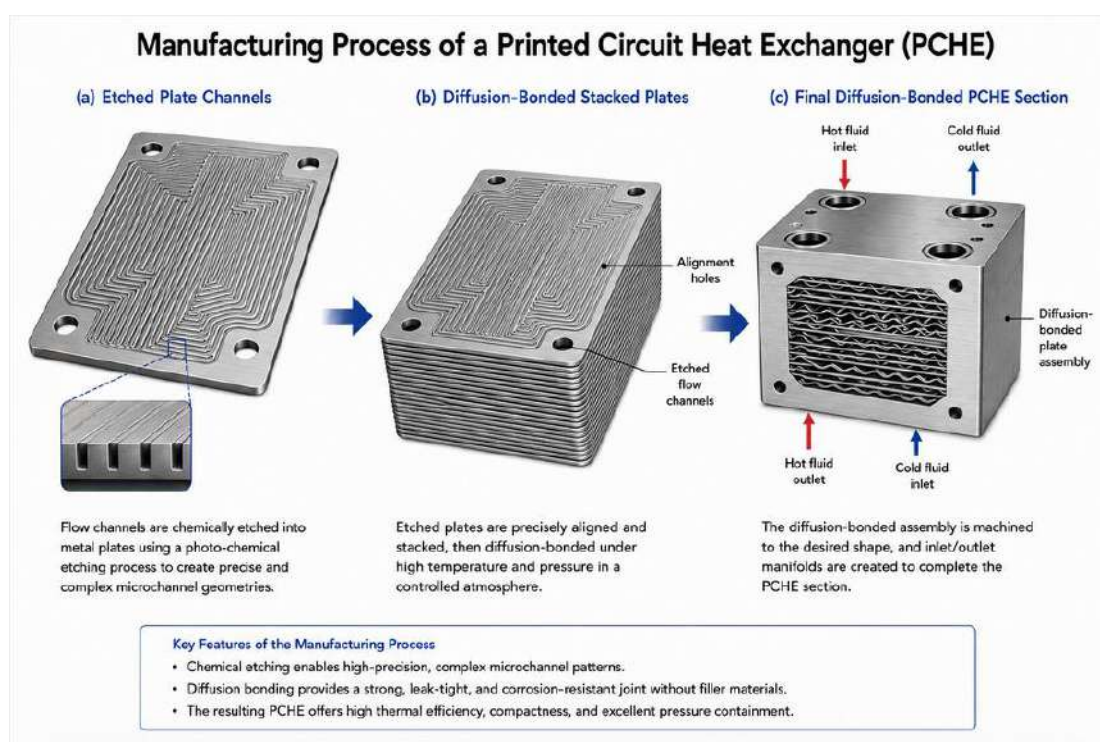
Manufacturing Process of a Printed Circuit Heat Exchanger (PCHE)
